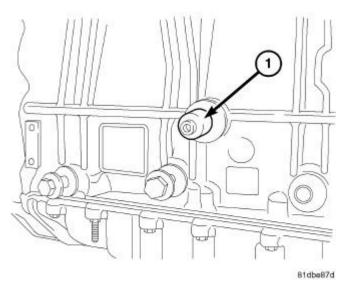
Crankshaft Locking Tool Courtesy of CHRYSLER LLC
